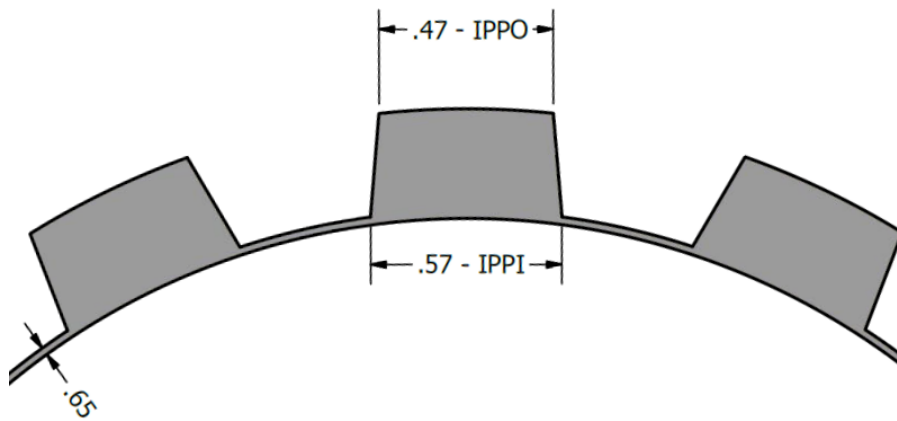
Drawing and dimensions of modulator segments and bridge
